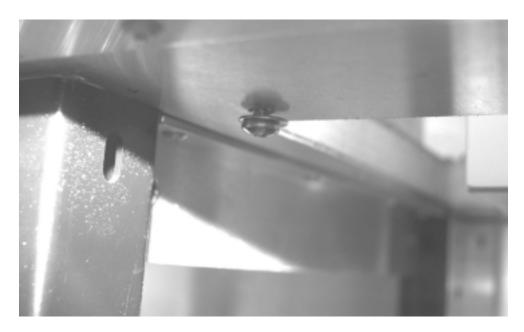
8500 module enclosure on top of outdoor enclosure.
